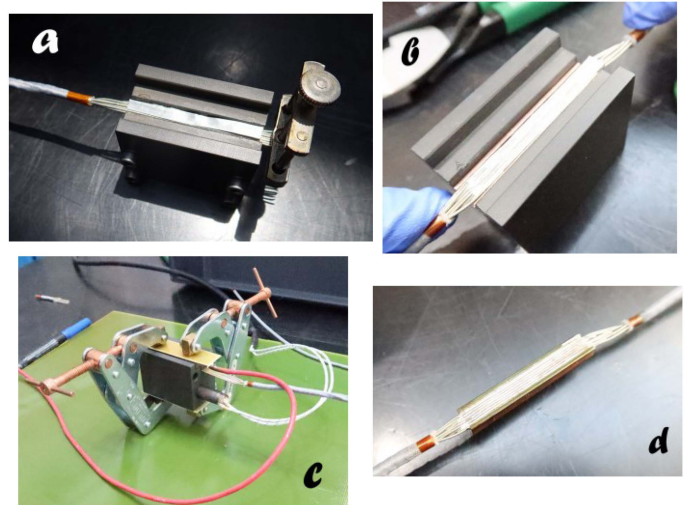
(a) Pre-tinning of one cable (b) placing both cables for soldering. (c) Closed mold with probes. (d) Final splice.
